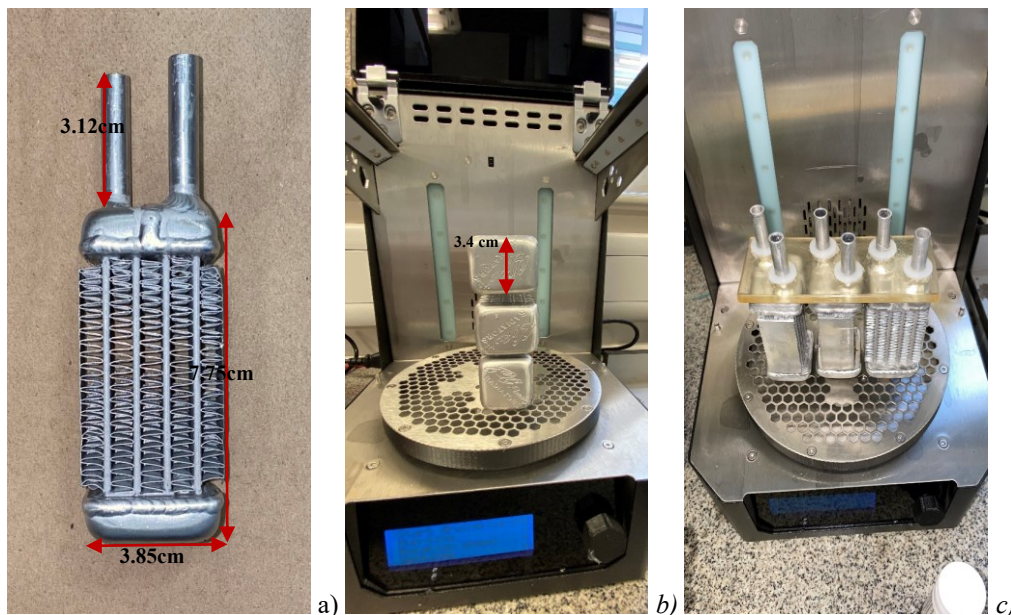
a) Top view and the dimensions of one of the heat exchanger used in the prototype. b) Back view of the heat exchangers inside the 3D-printing washing and curing machine; c) Side view of the assembled heat exchangers with the 3D printed cover sheet.
